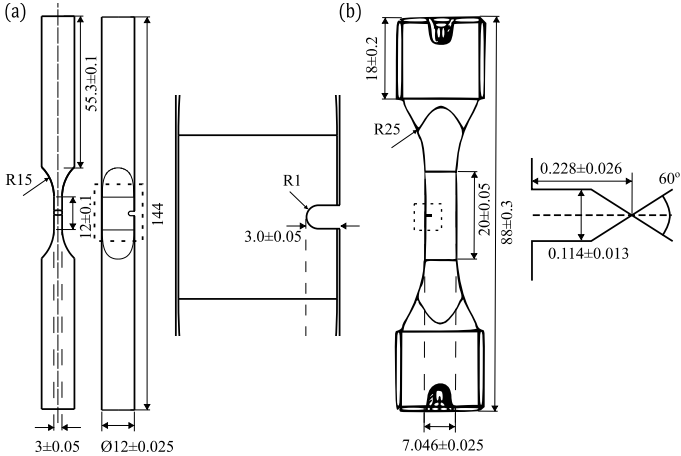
(a) Single edge notched and (b) corner crack specimen geometry used for the internal TMF crack growth round robin tests
